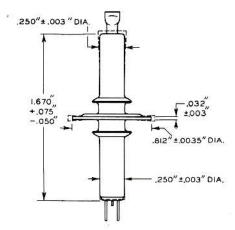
Dimensional outline of the RCA-5893 pencil tube.
